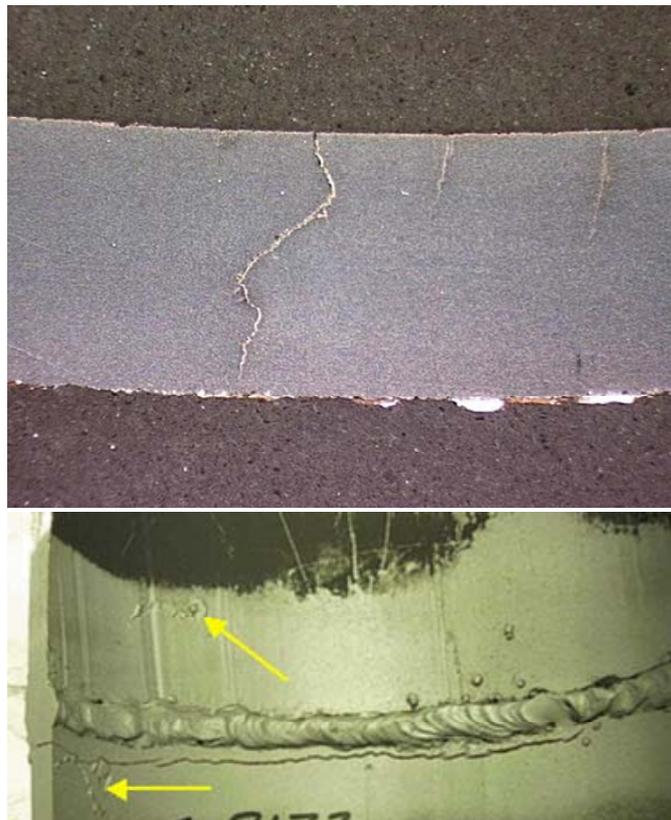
SCC failure and leak area resulting from ethanol SCC in steel equipment.
